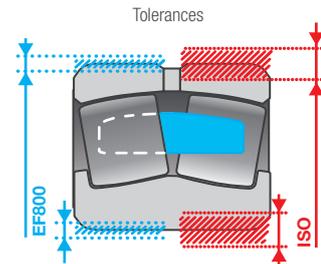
Special tolerances for the outer diameter and bore
